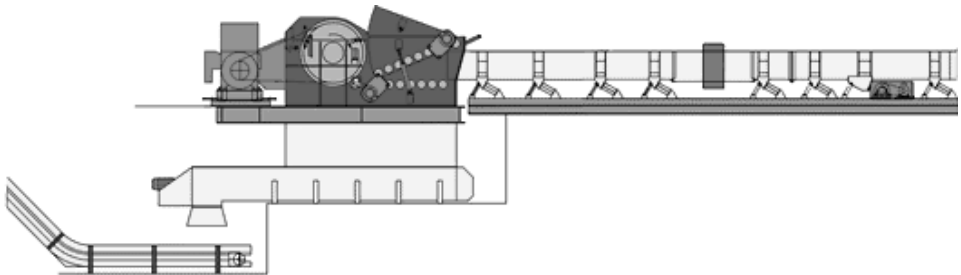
Layout of drum chipper including feeding conveyor (belt or vibration conveyor) and gravity discharge onto a belt conveyor [19].
